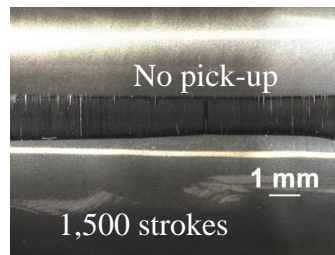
Tool surface appearance under lubricated condition after 1,500 strokes.
